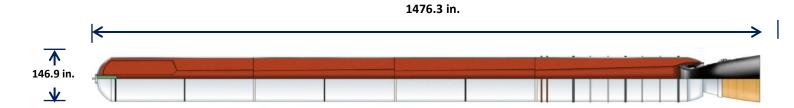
Motor Dimensions of the Castor 1200 First Stage.
